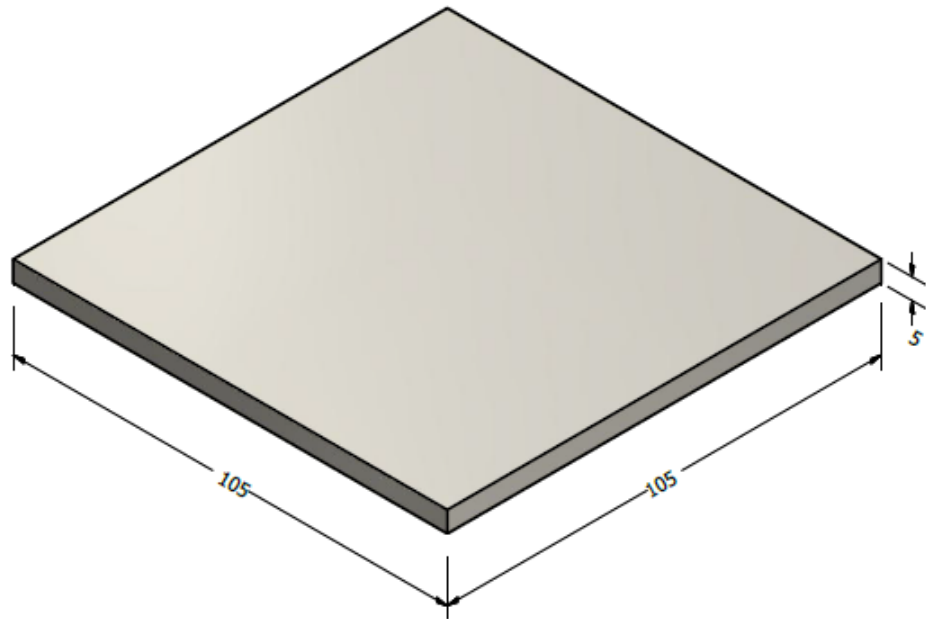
Dimension of the Ti-6Al-4V workpiece in millimeters
